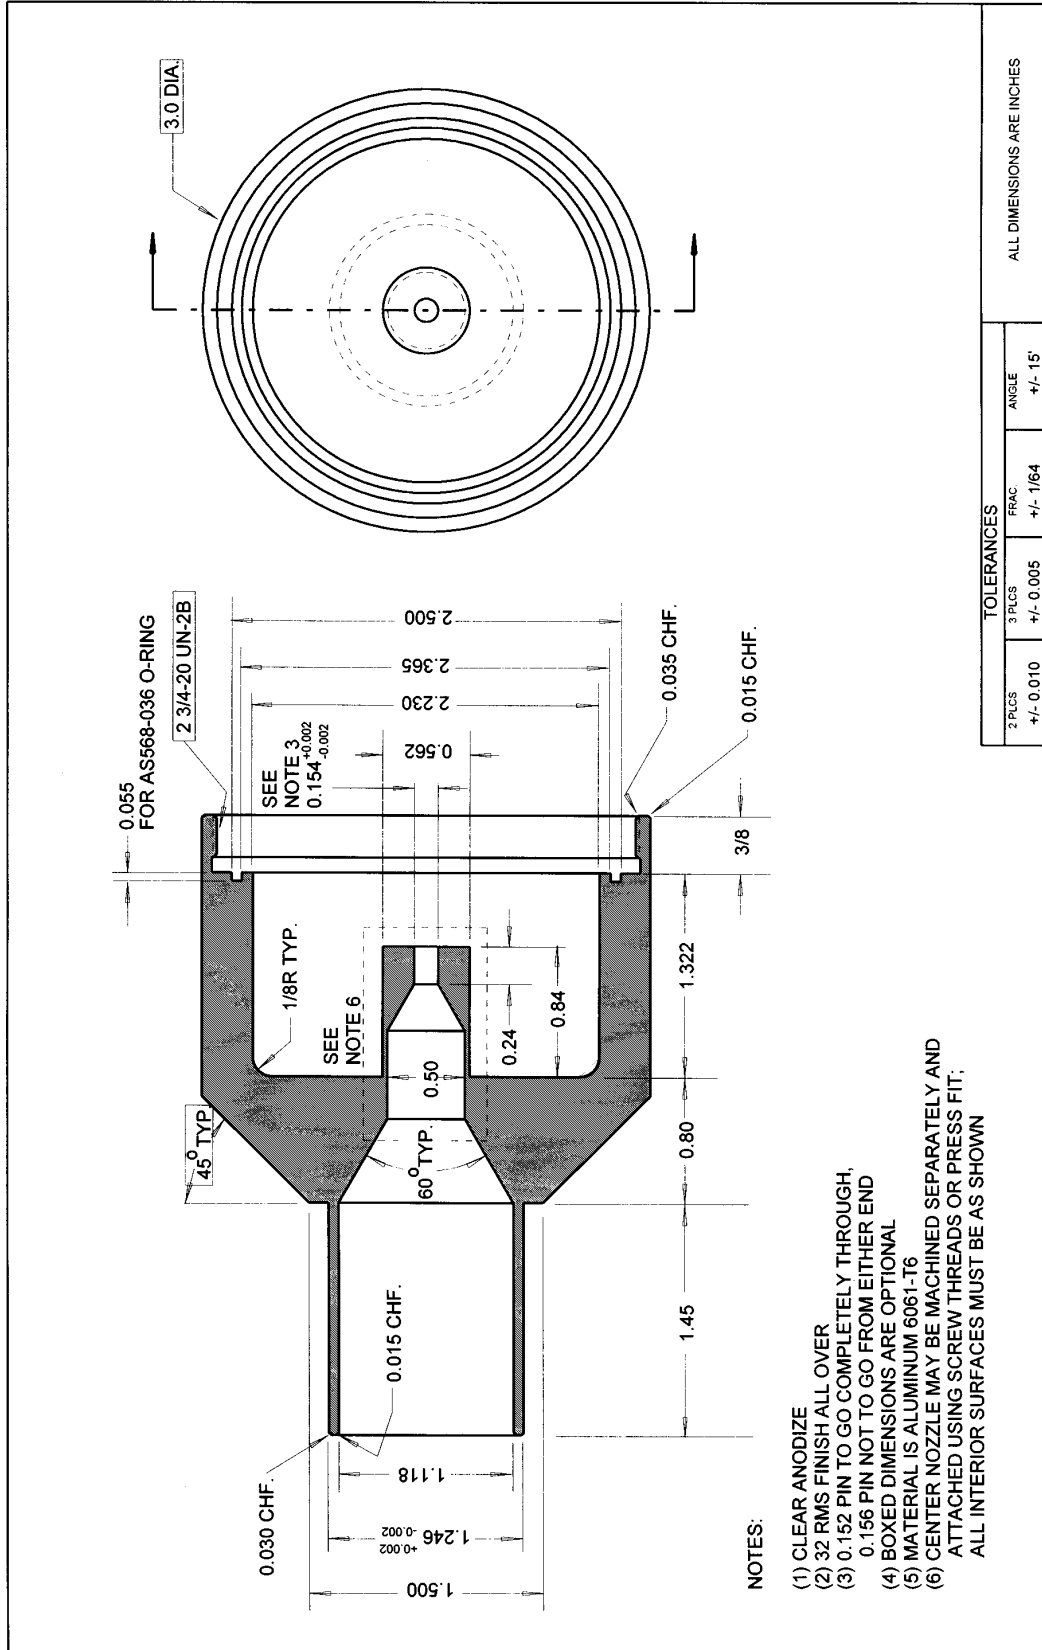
2.5-MICRON IMPACTOR WELL, UPPER SECTION
